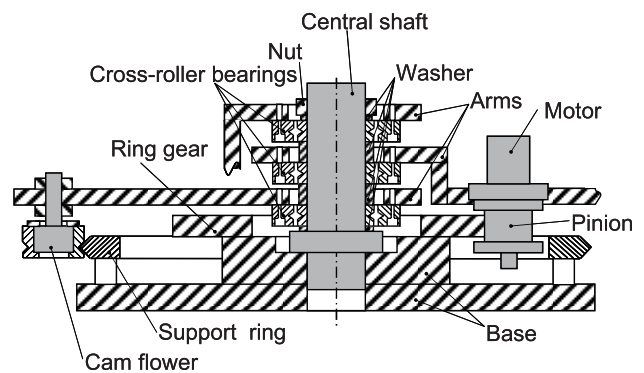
Details of the triple revolute joints on the base and the supporting and driving parts of the arms.
